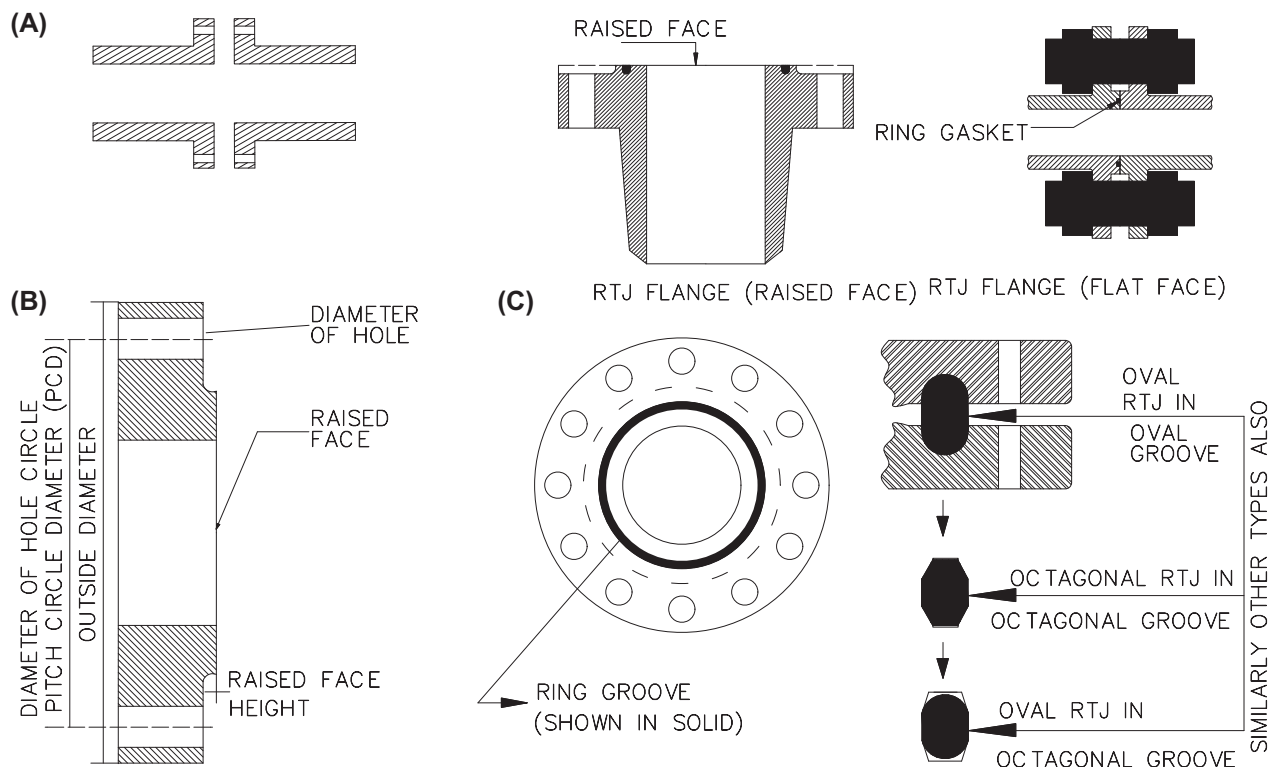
Flange types. (A) Flat face flange. (B) Raised face flange. (C) Ring type joint flange.
